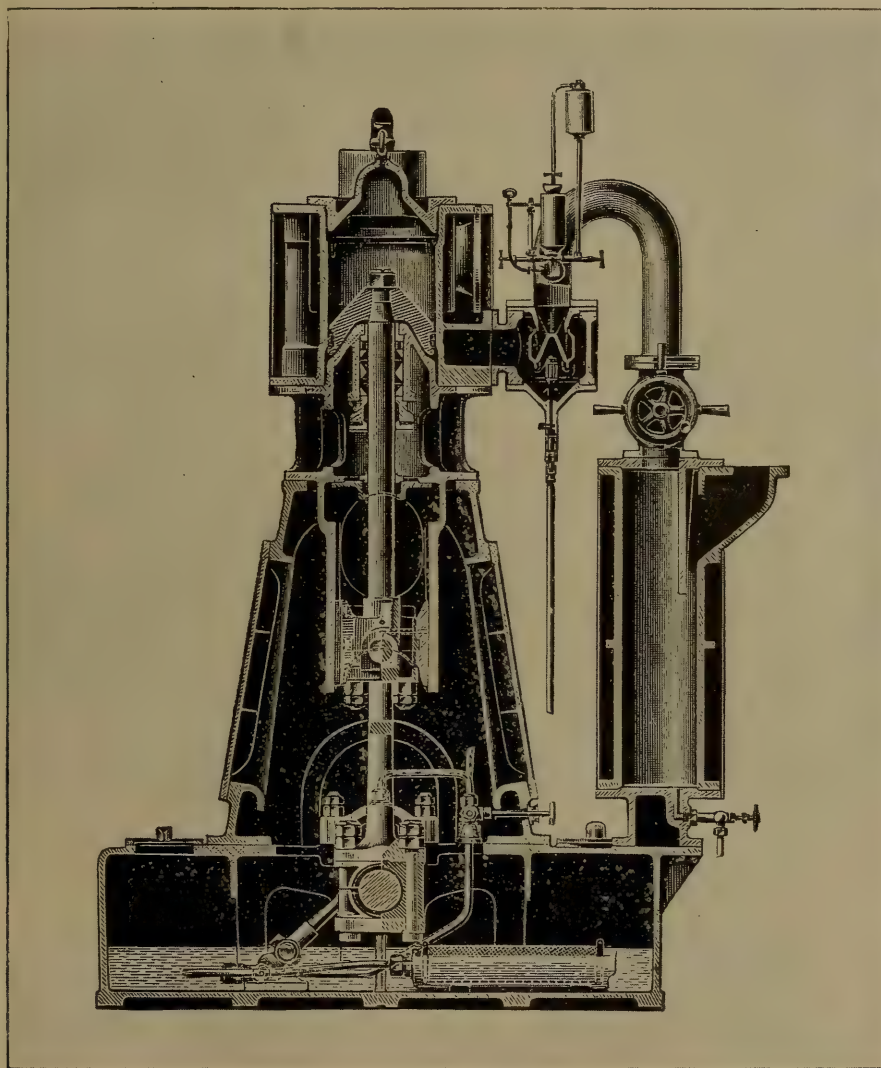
ANOTHER SECTIONAL VIEW OF THE BELLISS COMPOUND ENGINE
